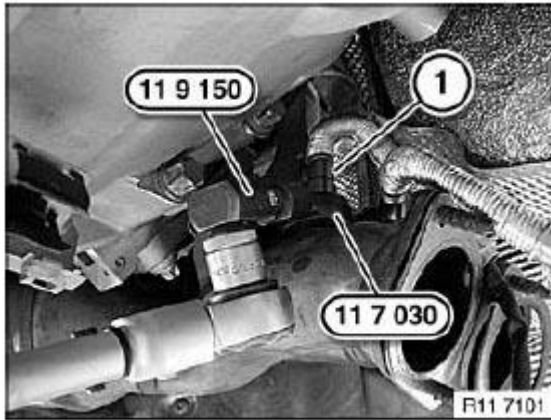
Releasing Monitor Sensor Using Special Tools 11 7 030 And 11 9 150
